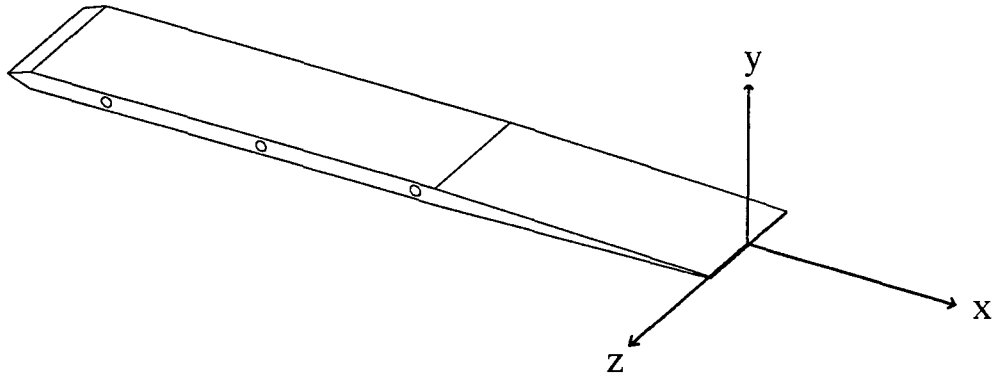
Drawing of the tapered plate with coordinate directions shown.
